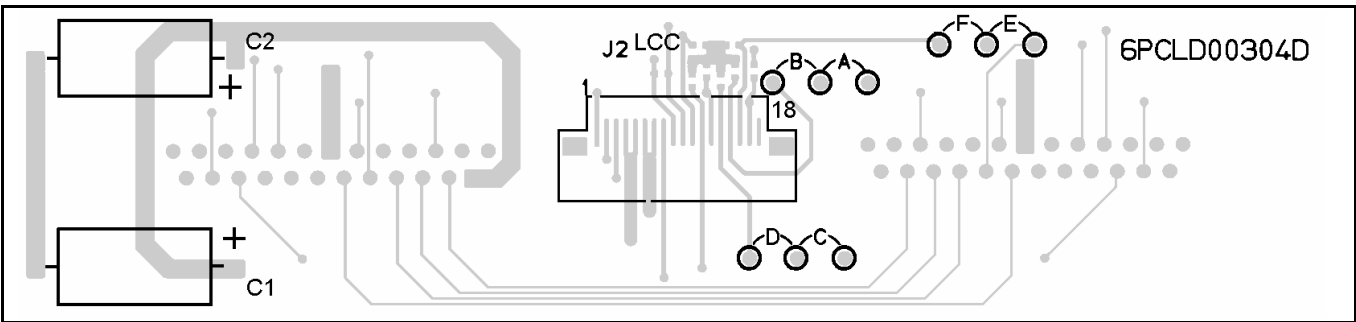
Remote Interface Adaptor NQZ-4882C Solder Side
